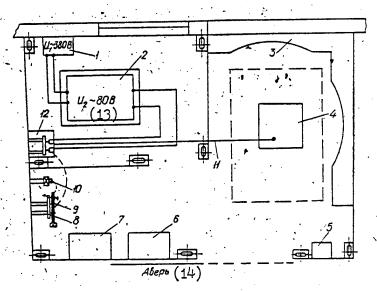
Arrangement of section for air-electrical arc machining of iron castings: 13 -- 80 volts; 14 -- Door.
